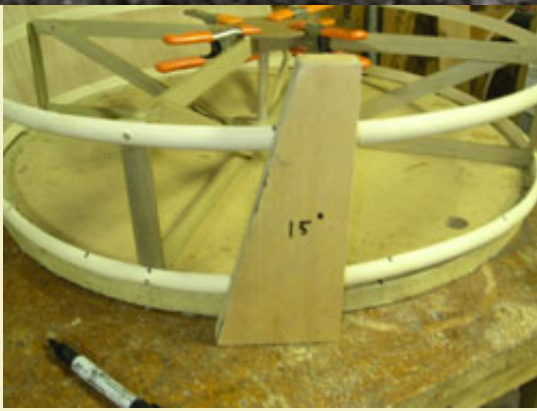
Using a 15 degree angle jig to mark driver connection points.
